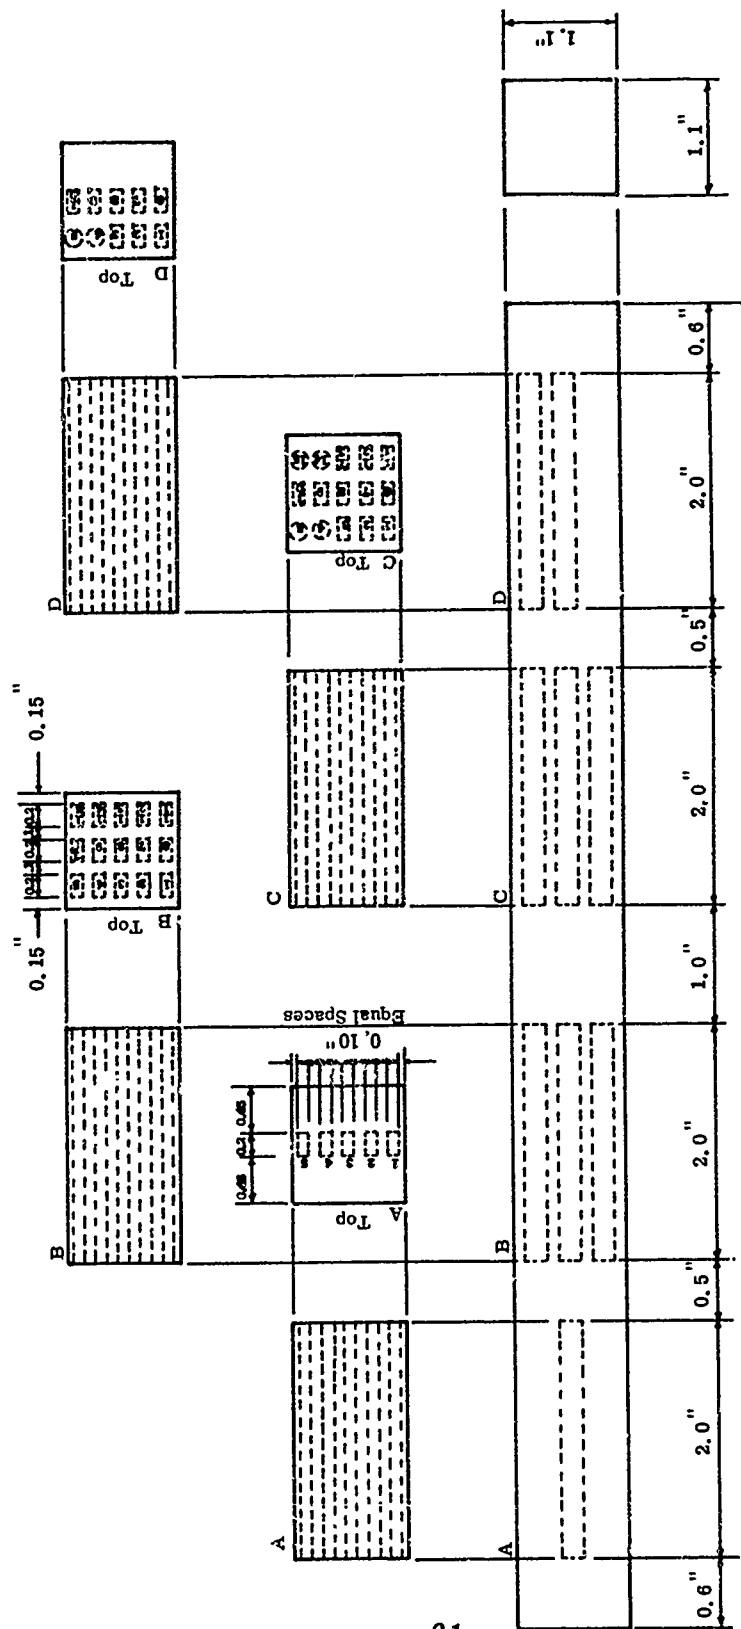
Configuration of Specimen Blank 1831-A-10 as received from Coors and Cutting Plan for Removing Phase I Macro Tensile and Macro Flexural Specimens (Item 86)
